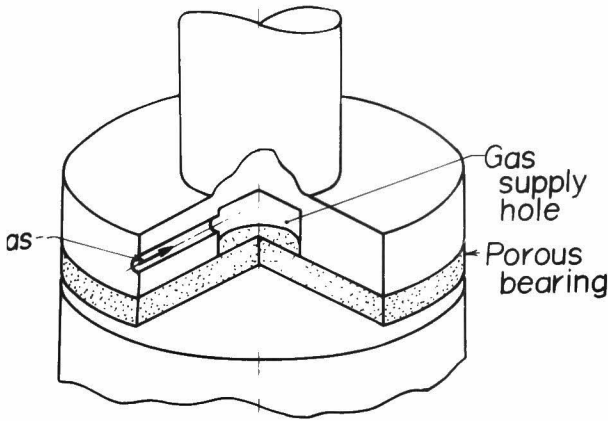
Construction of externally pressurized circular thrust porous gas-bearing
